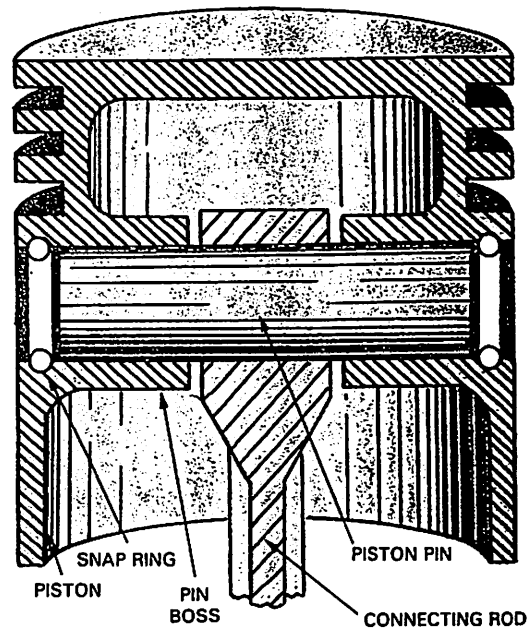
Piston is fastened to the connecting rod with a piston pin.
